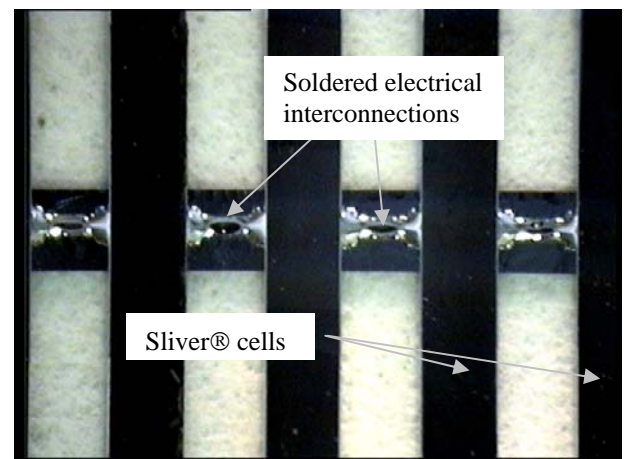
Detailed view of a soldered Raft formed using a multi-stack cassette.
